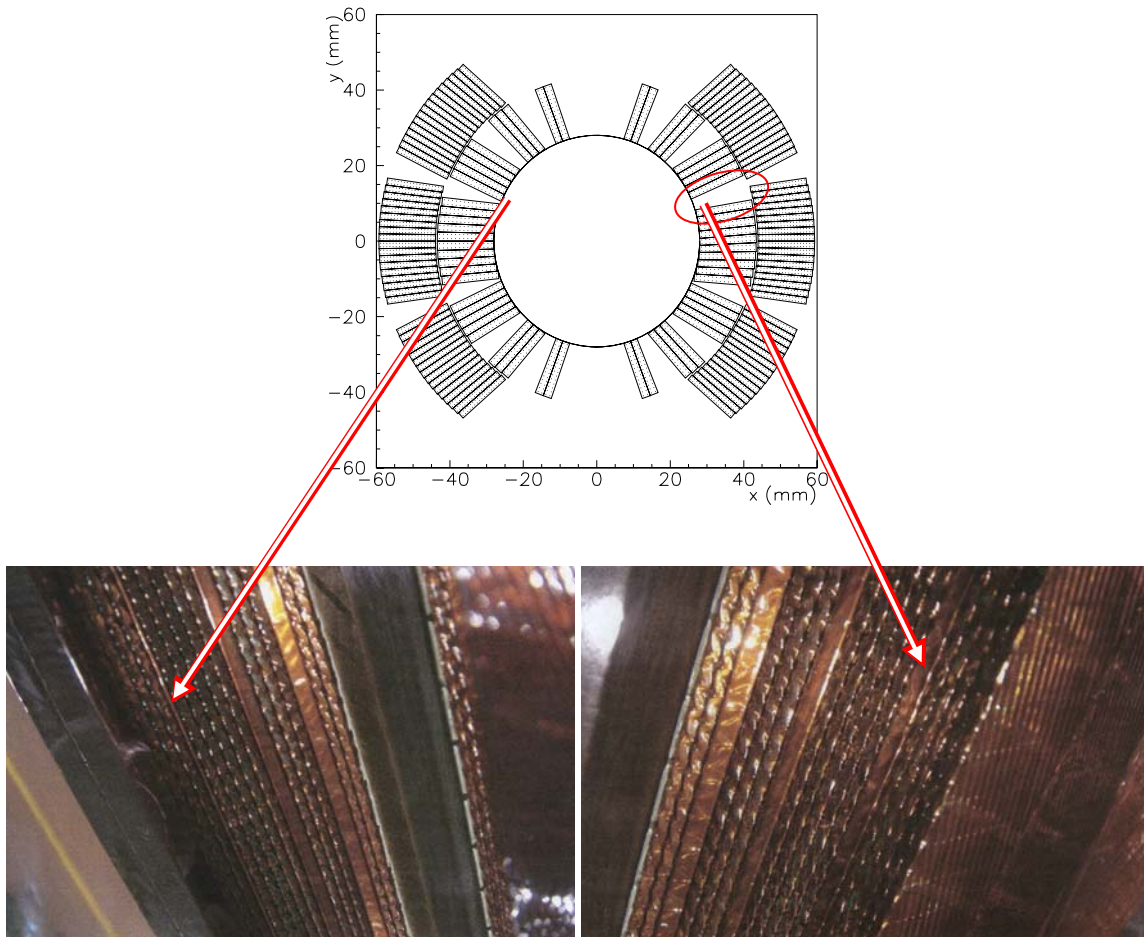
Assembly defect found in 2421: cross-section sketch (upper part) with wrong copper wedge (red circle), internal side of the inner coil, left part with no defect (left) and right part with defect (right).
